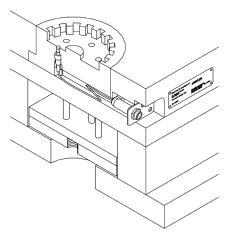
Sensor, cable, connector, mounting plate (Art. No. 3.520.328) and identification label (Art. No. 3.520.899)
